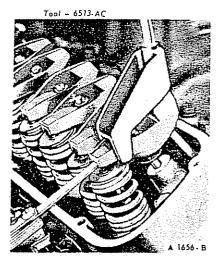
Checking Valve Clearance Hydraulic Valve Lifters
